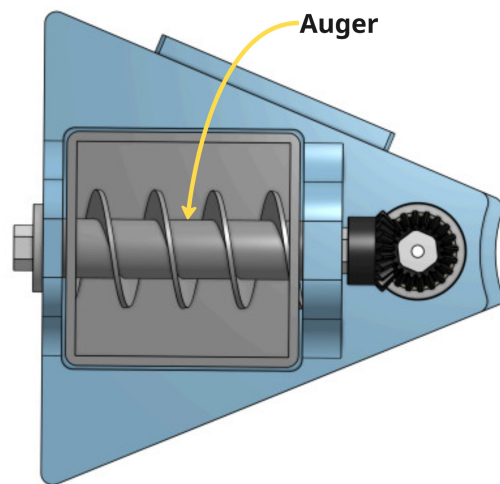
Top-view CAD render of the engagement mechanism, showing the auger screw inside the container body and the hex shaft connecting it to the spur gear face.
